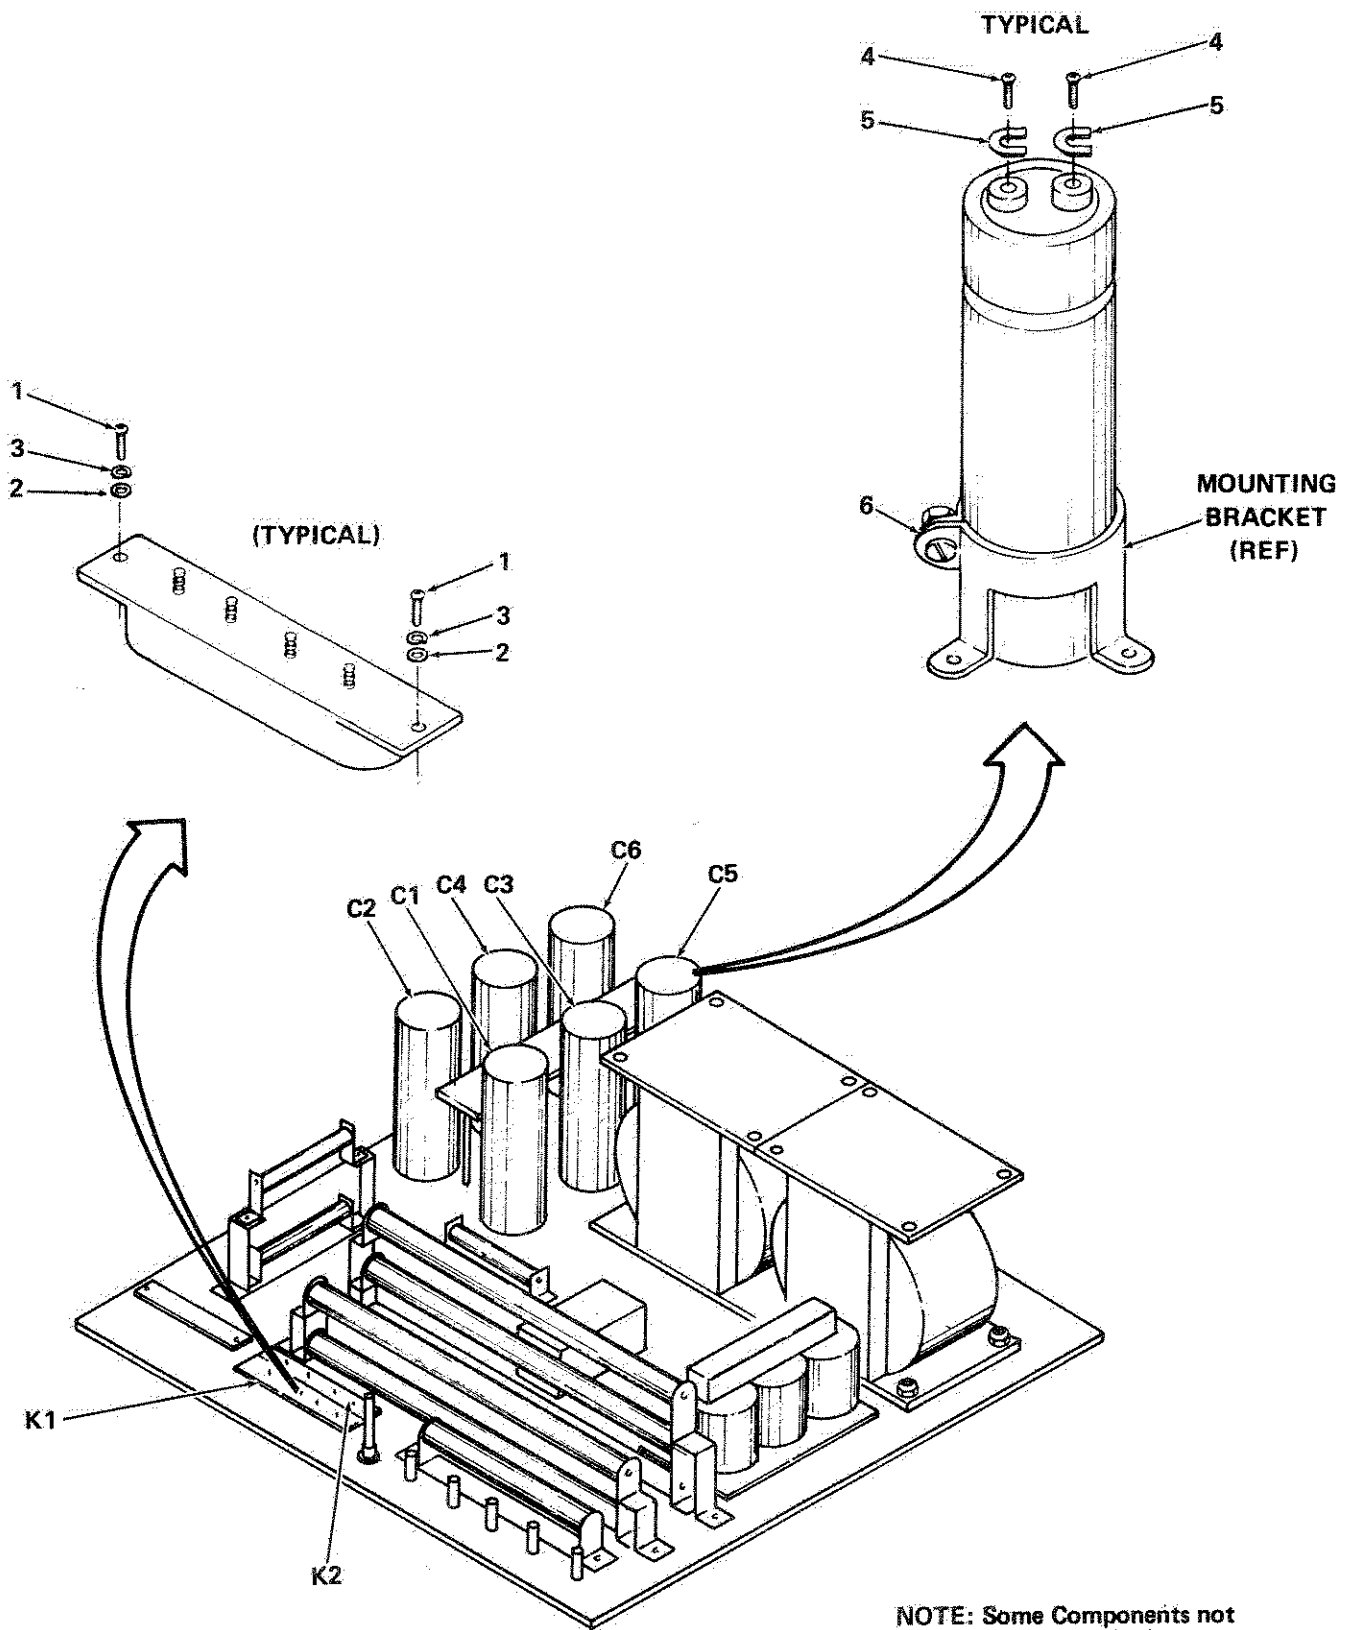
K1 or K2, C1 through C6 Removal/Installation
